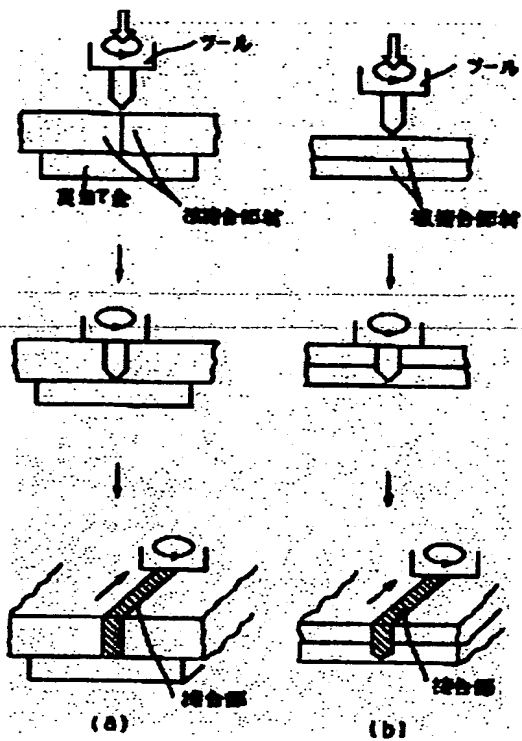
It is the explanatory view of the 2nd example of the manufacture approach of the conventional aluminum containing alloy panel.
